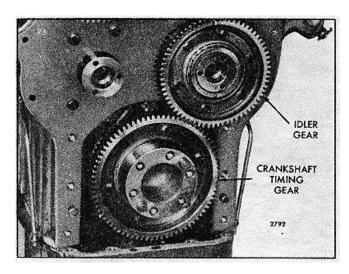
Crankshaft Timing Gear Mounting (R.H. Rotation Engine Shown)
